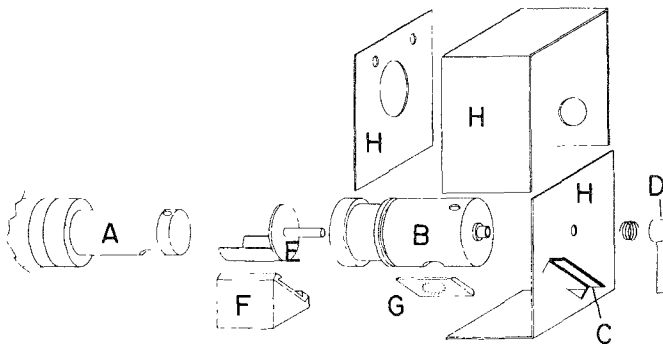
E.3. An exploded view of the irradiation chamber: (A) X-ray tube, (B) X-ray tube shield, (C) access door, (D) shutter lever, (E) shutter, (F) vee-way mounting block, (G) sample holder, (H) brass chamber.
